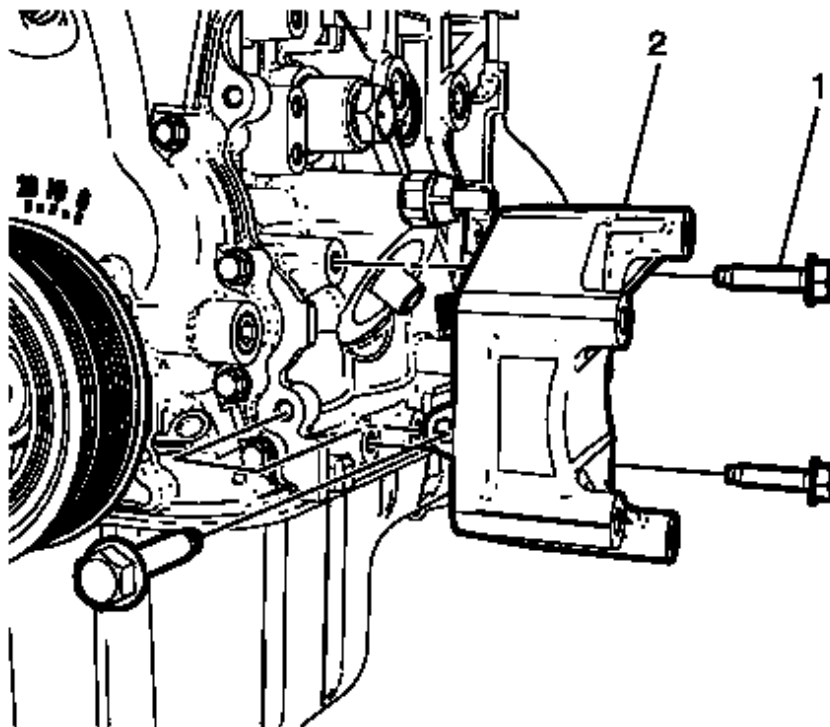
Air Conditioning Compressor Bolts And Bracket
